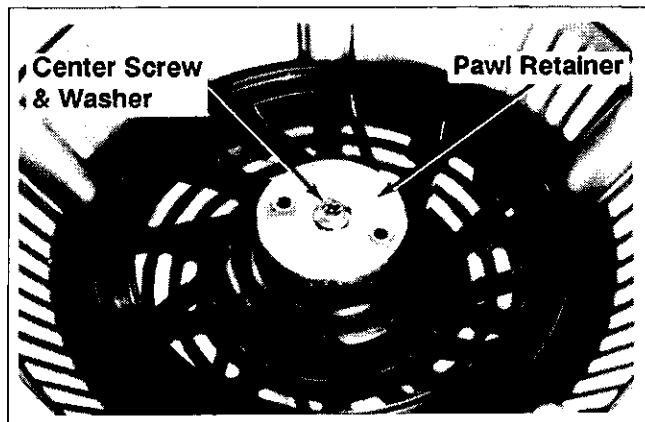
Center Screw, Washer and Pawl Retainer.
